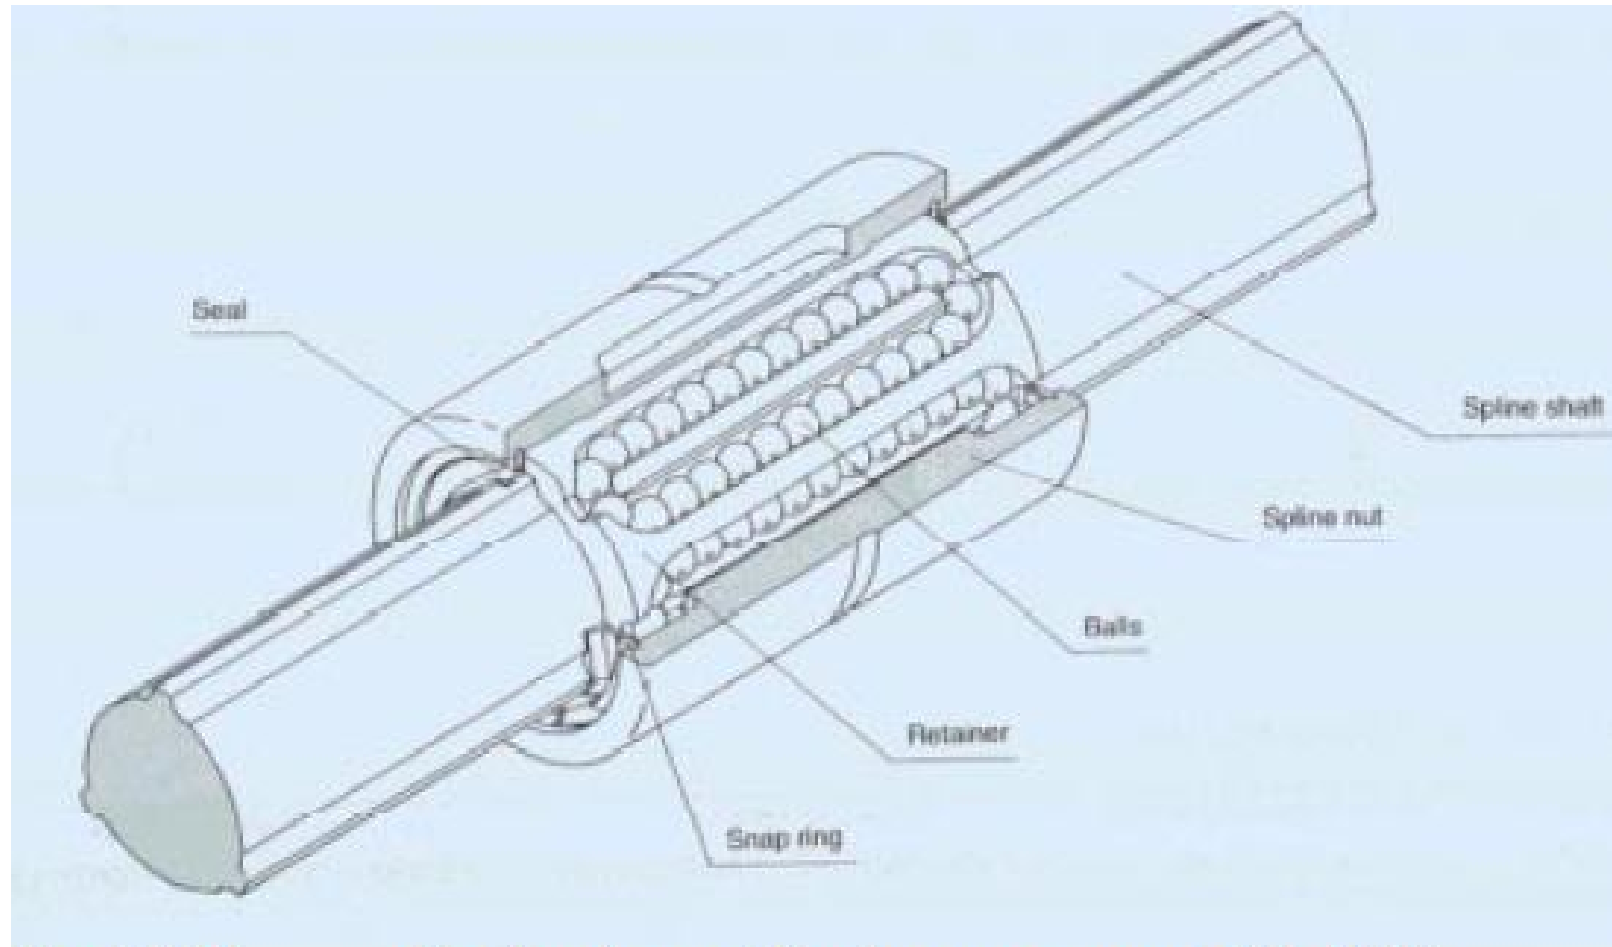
Ball bush used for linear movement in CNC machine tools (Courtesy THK Co. Ltd., Japan).
